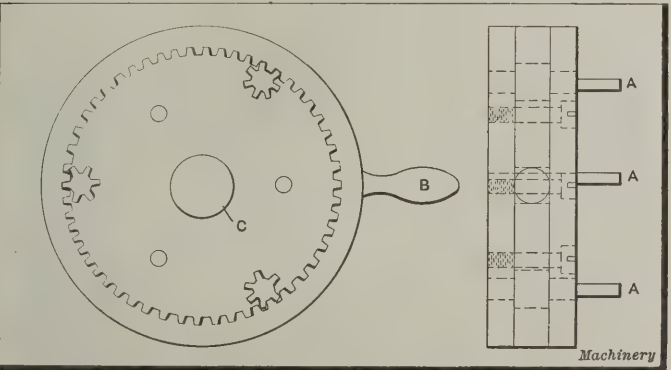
Fixture used for locating Bearing at Center of Wheel
